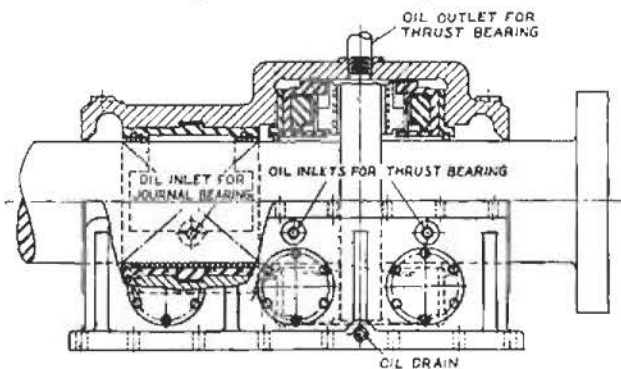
Combined horizontal mounting for journal and double thrust bearing. Collar is integral with shaft. Forced lubrication is used. Base flange is provided for attachment. STANDARDIZED: See Bulletin G-1.
